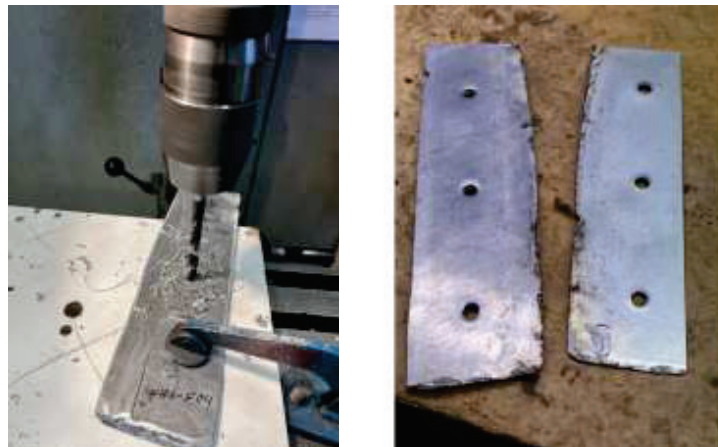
Drilling operation on SPR joints (left) and separated aluminium and steel material (right)
